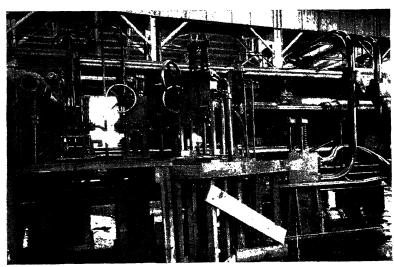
Large extrusion press. Operating controls and hydraulic supply lines are shown. See also Fig. 83. (Baldwin-Southwark.)
